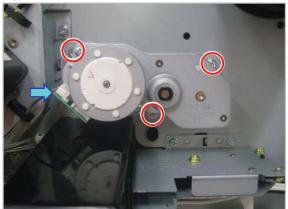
Remove the fuser drive and LVPS boards and cage
